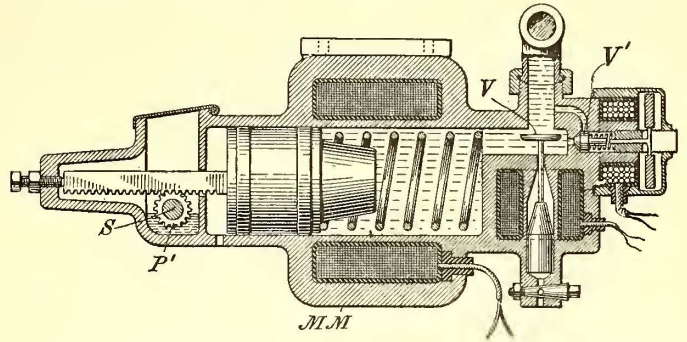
CROSS-SECTION OF MASTER MAGNET, SHOWING VALVE WHICH REGULATES THE RAPIDITY WITH WHICH RESISTANCE IS CUT OUT OF CIRCUIT
